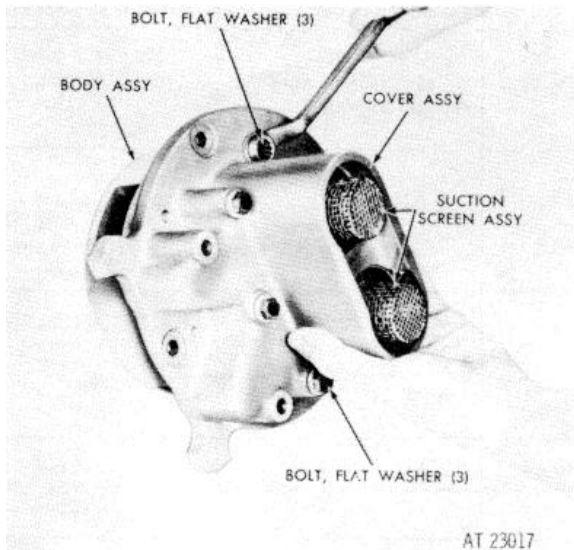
Removing (or installing) brake coolant pump cover assembly bolt.
